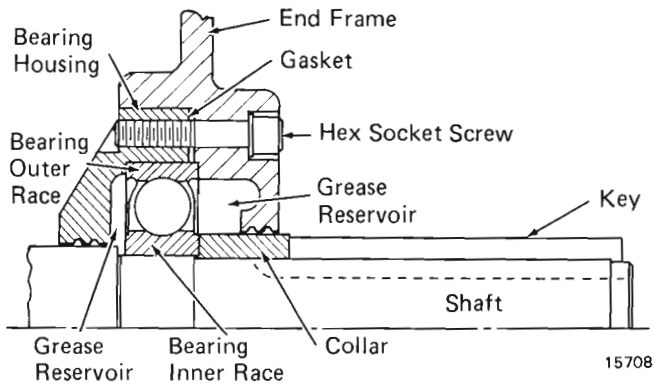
A - Older Style (Shielded) Bearing Assembly, Cross-Section
